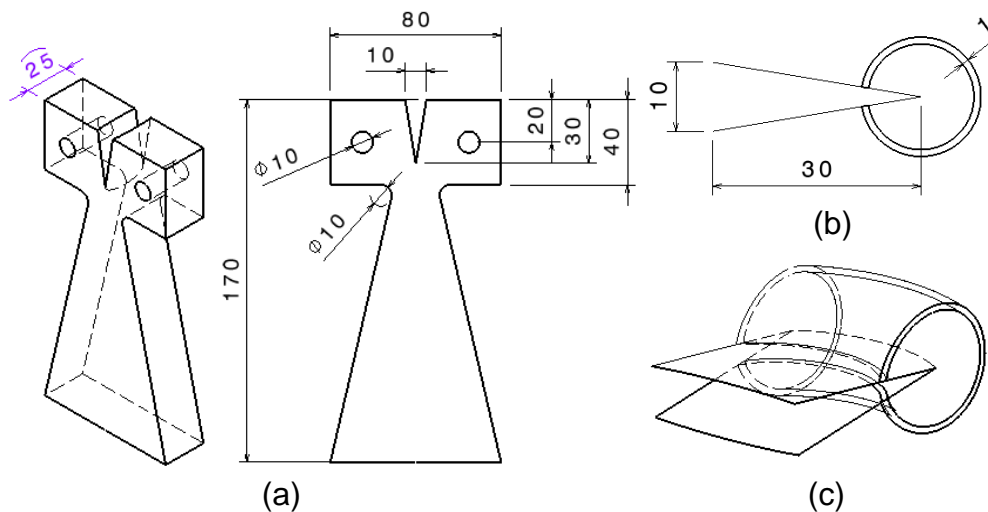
DCBVI specimen (a), two-dimensional crack tip (b) and 3D elliptical crack front (c)
